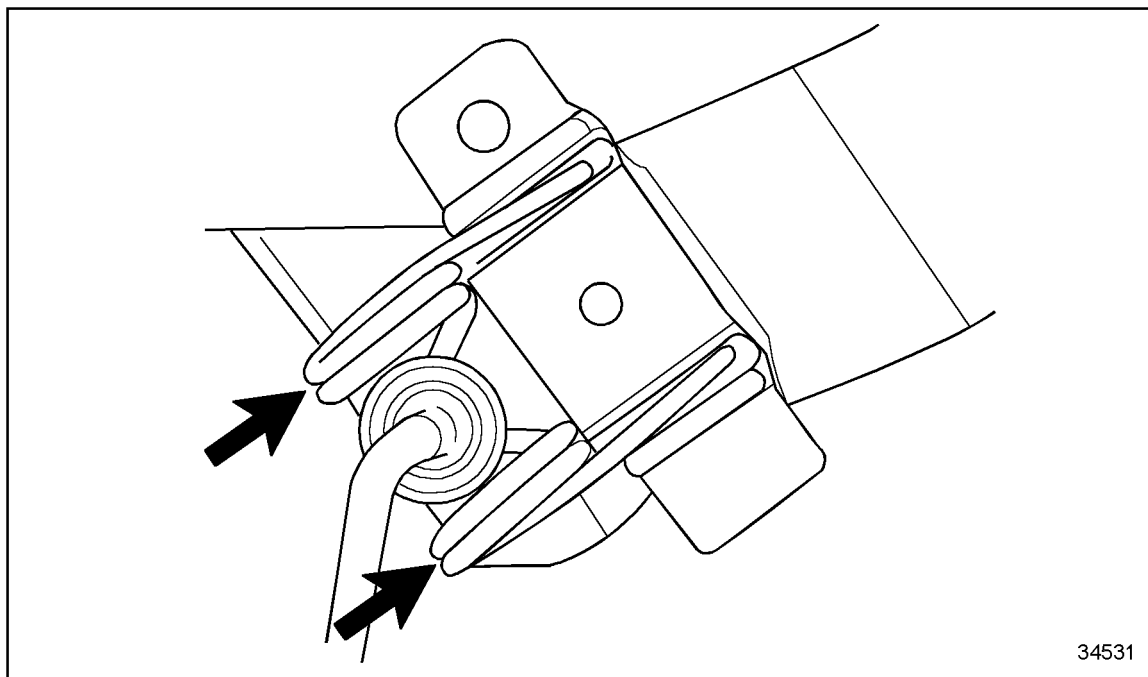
Installing the Slave Piston Assembly Torsion Spring
